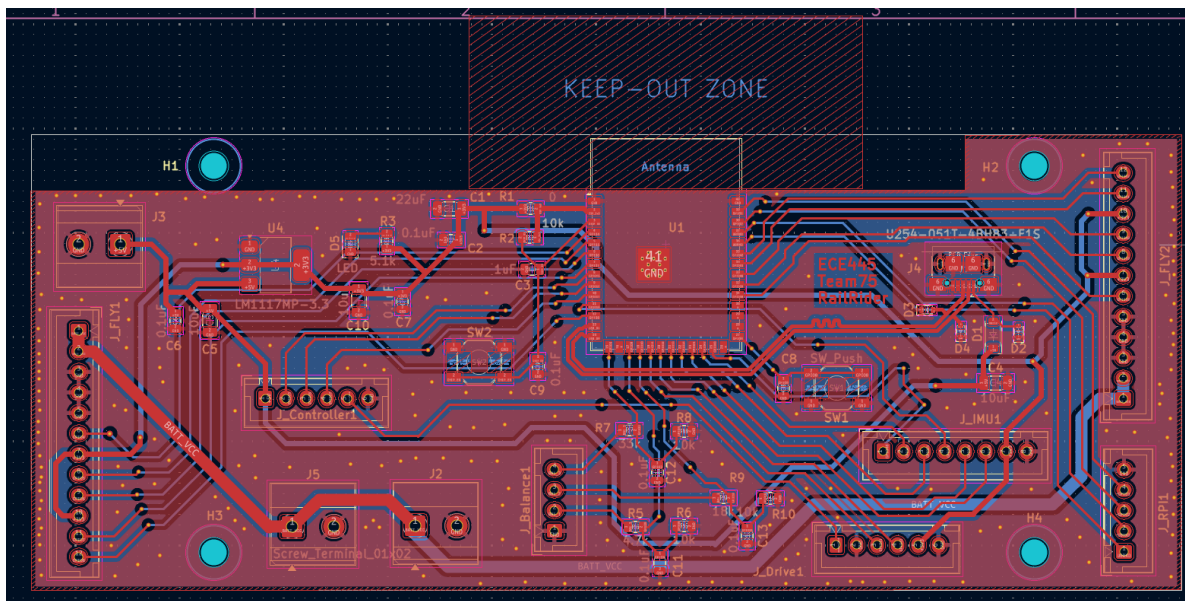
Final front-side PCB layout for the two-flywheel RailRider board. The ESP32-S3-WROOM-1 is placed near the board edge for antenna clearance, with subsystem connectors arranged around it for cleaner routing.
